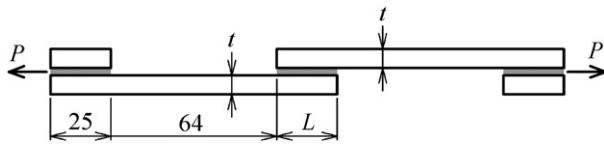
Geometry (mm) of single-lap joints (SLJ) tested.
